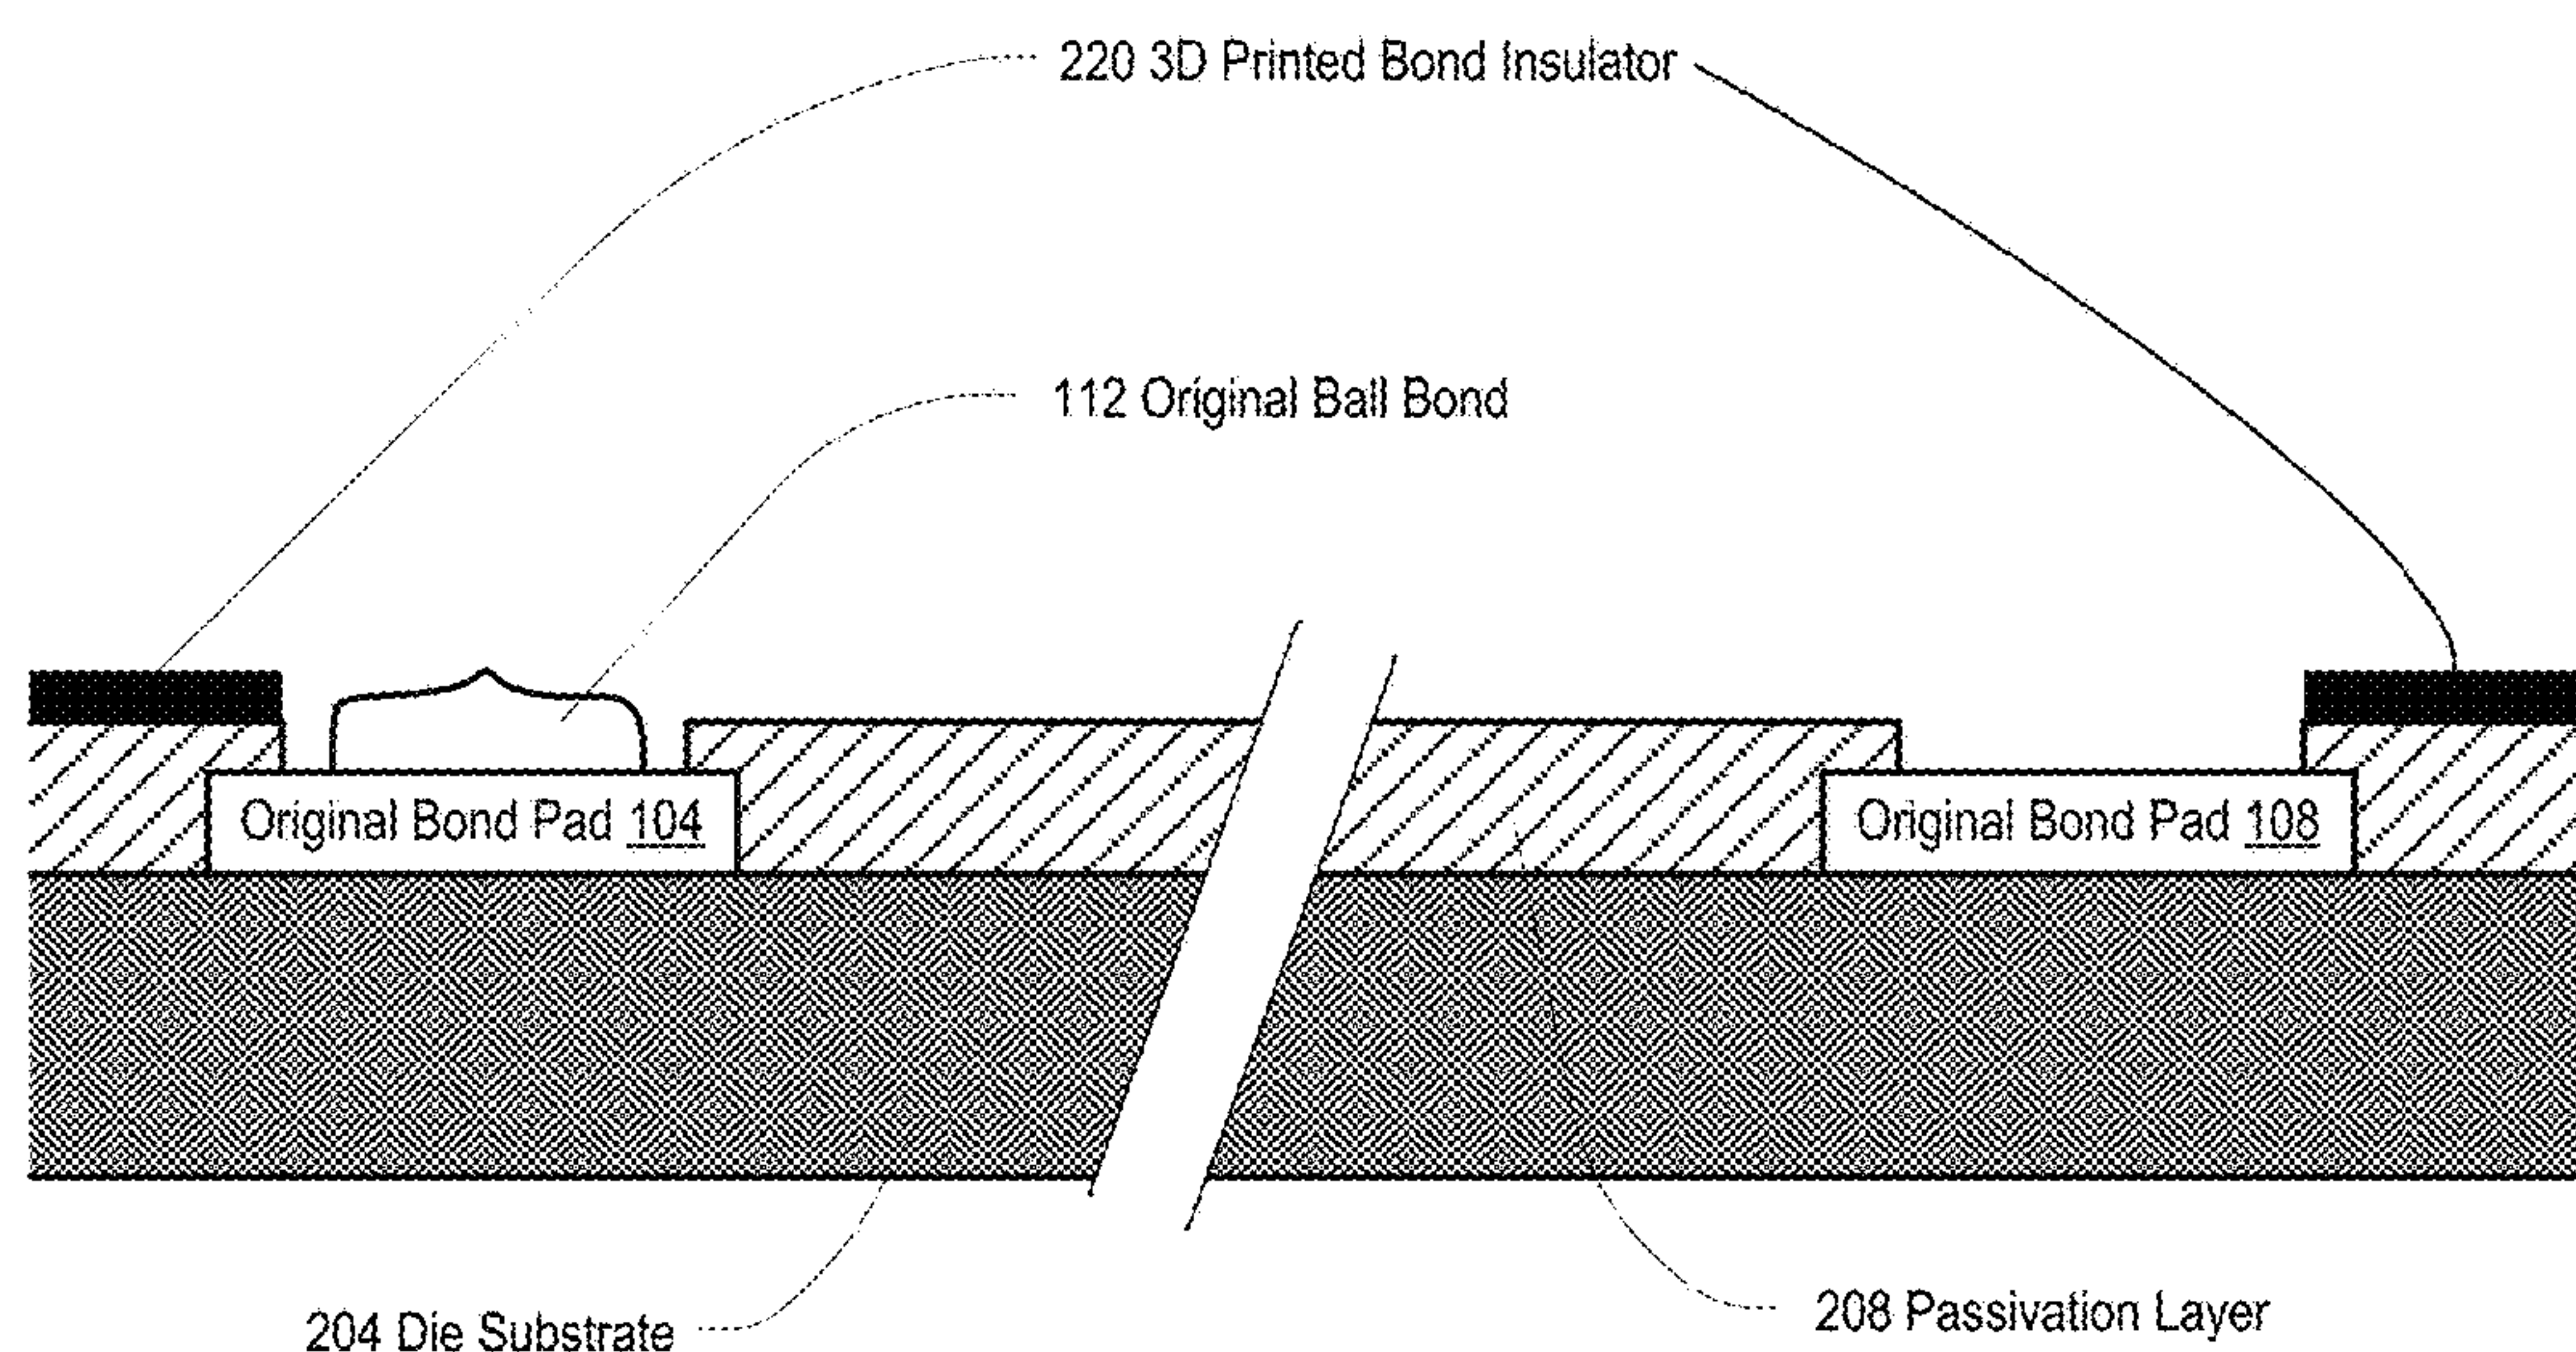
E Extracted Die Section A-A After 3D Printing Insulator and Conductor
